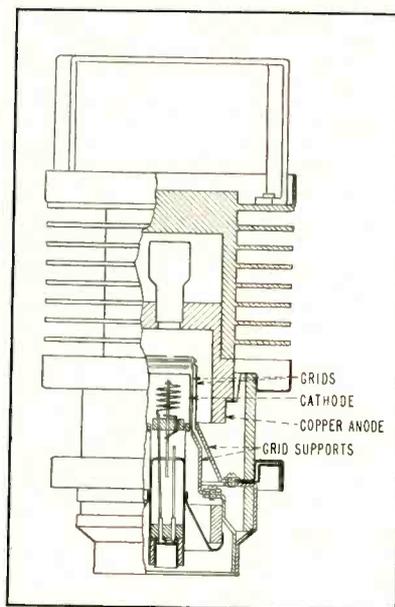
Cut-away view of GL-6283, 250-watt uhf driver
